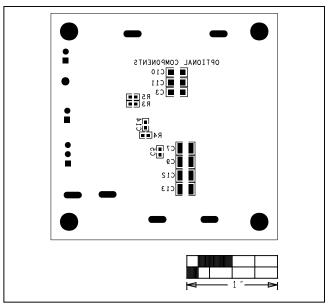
MAXM17545 EV Kit Component Placement Guide—Solder-Side
